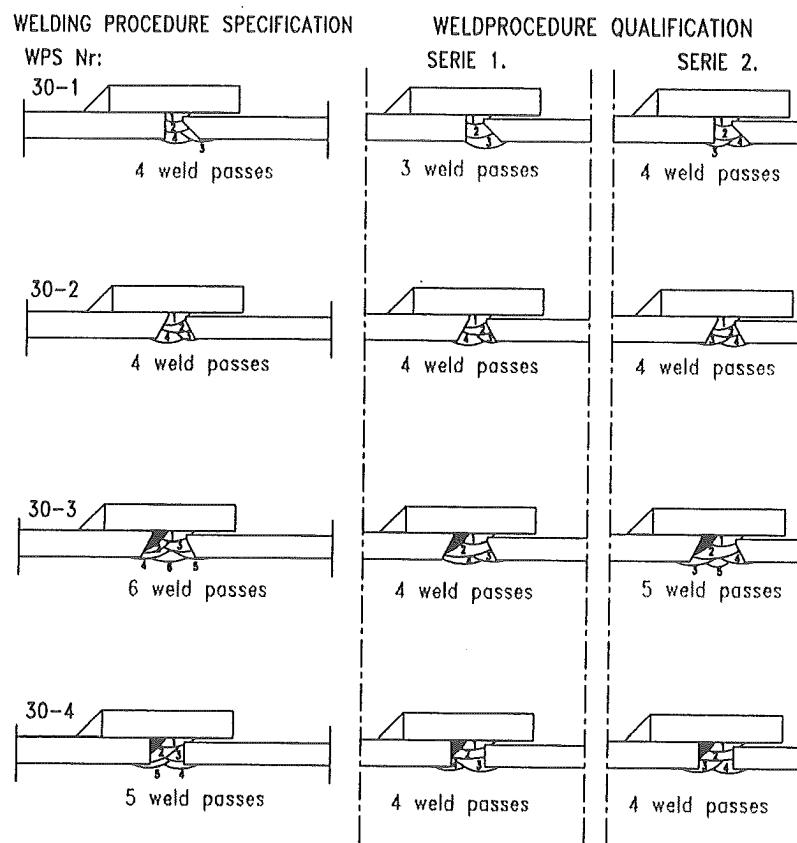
Weldprocedure qualification - welding tests Serie 1 and 2.
